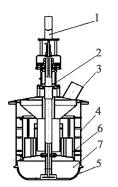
Rotating vibrating granulator (RVG): 1 – vibrating device; 2 – bearing assembly; 3 – float inlet pipe; 4 – cylindrical body; 5 – perforated bottom (basket); 6 – distributor; 7 – pressure vanes
